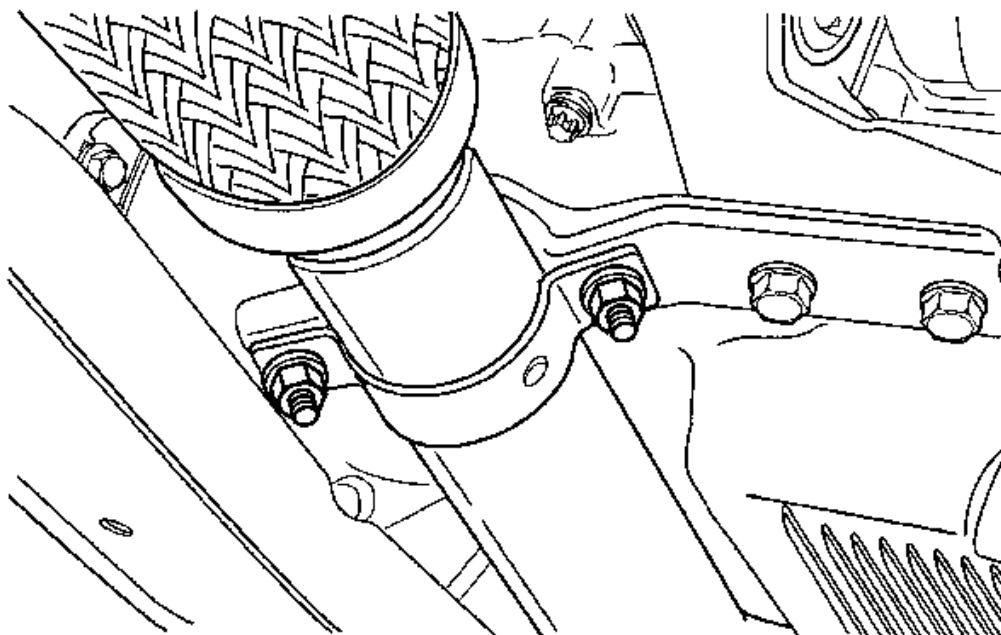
View Of Connecting Pipe, Mounting Bracket And Nuts
